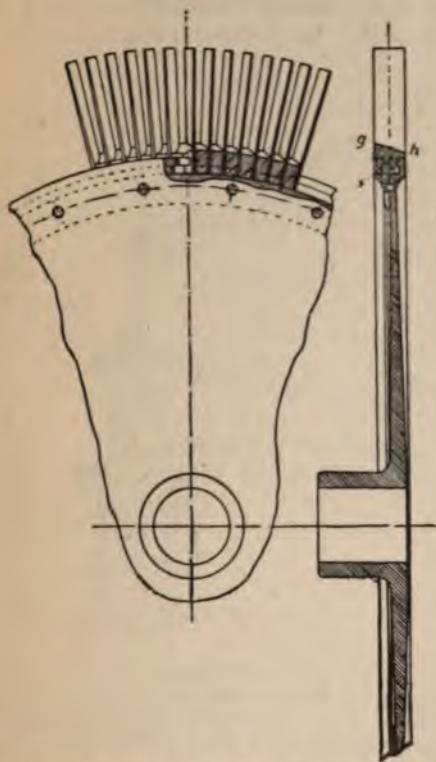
Runner of Zoelly Steam Turbine, in Plan and Elevation.
